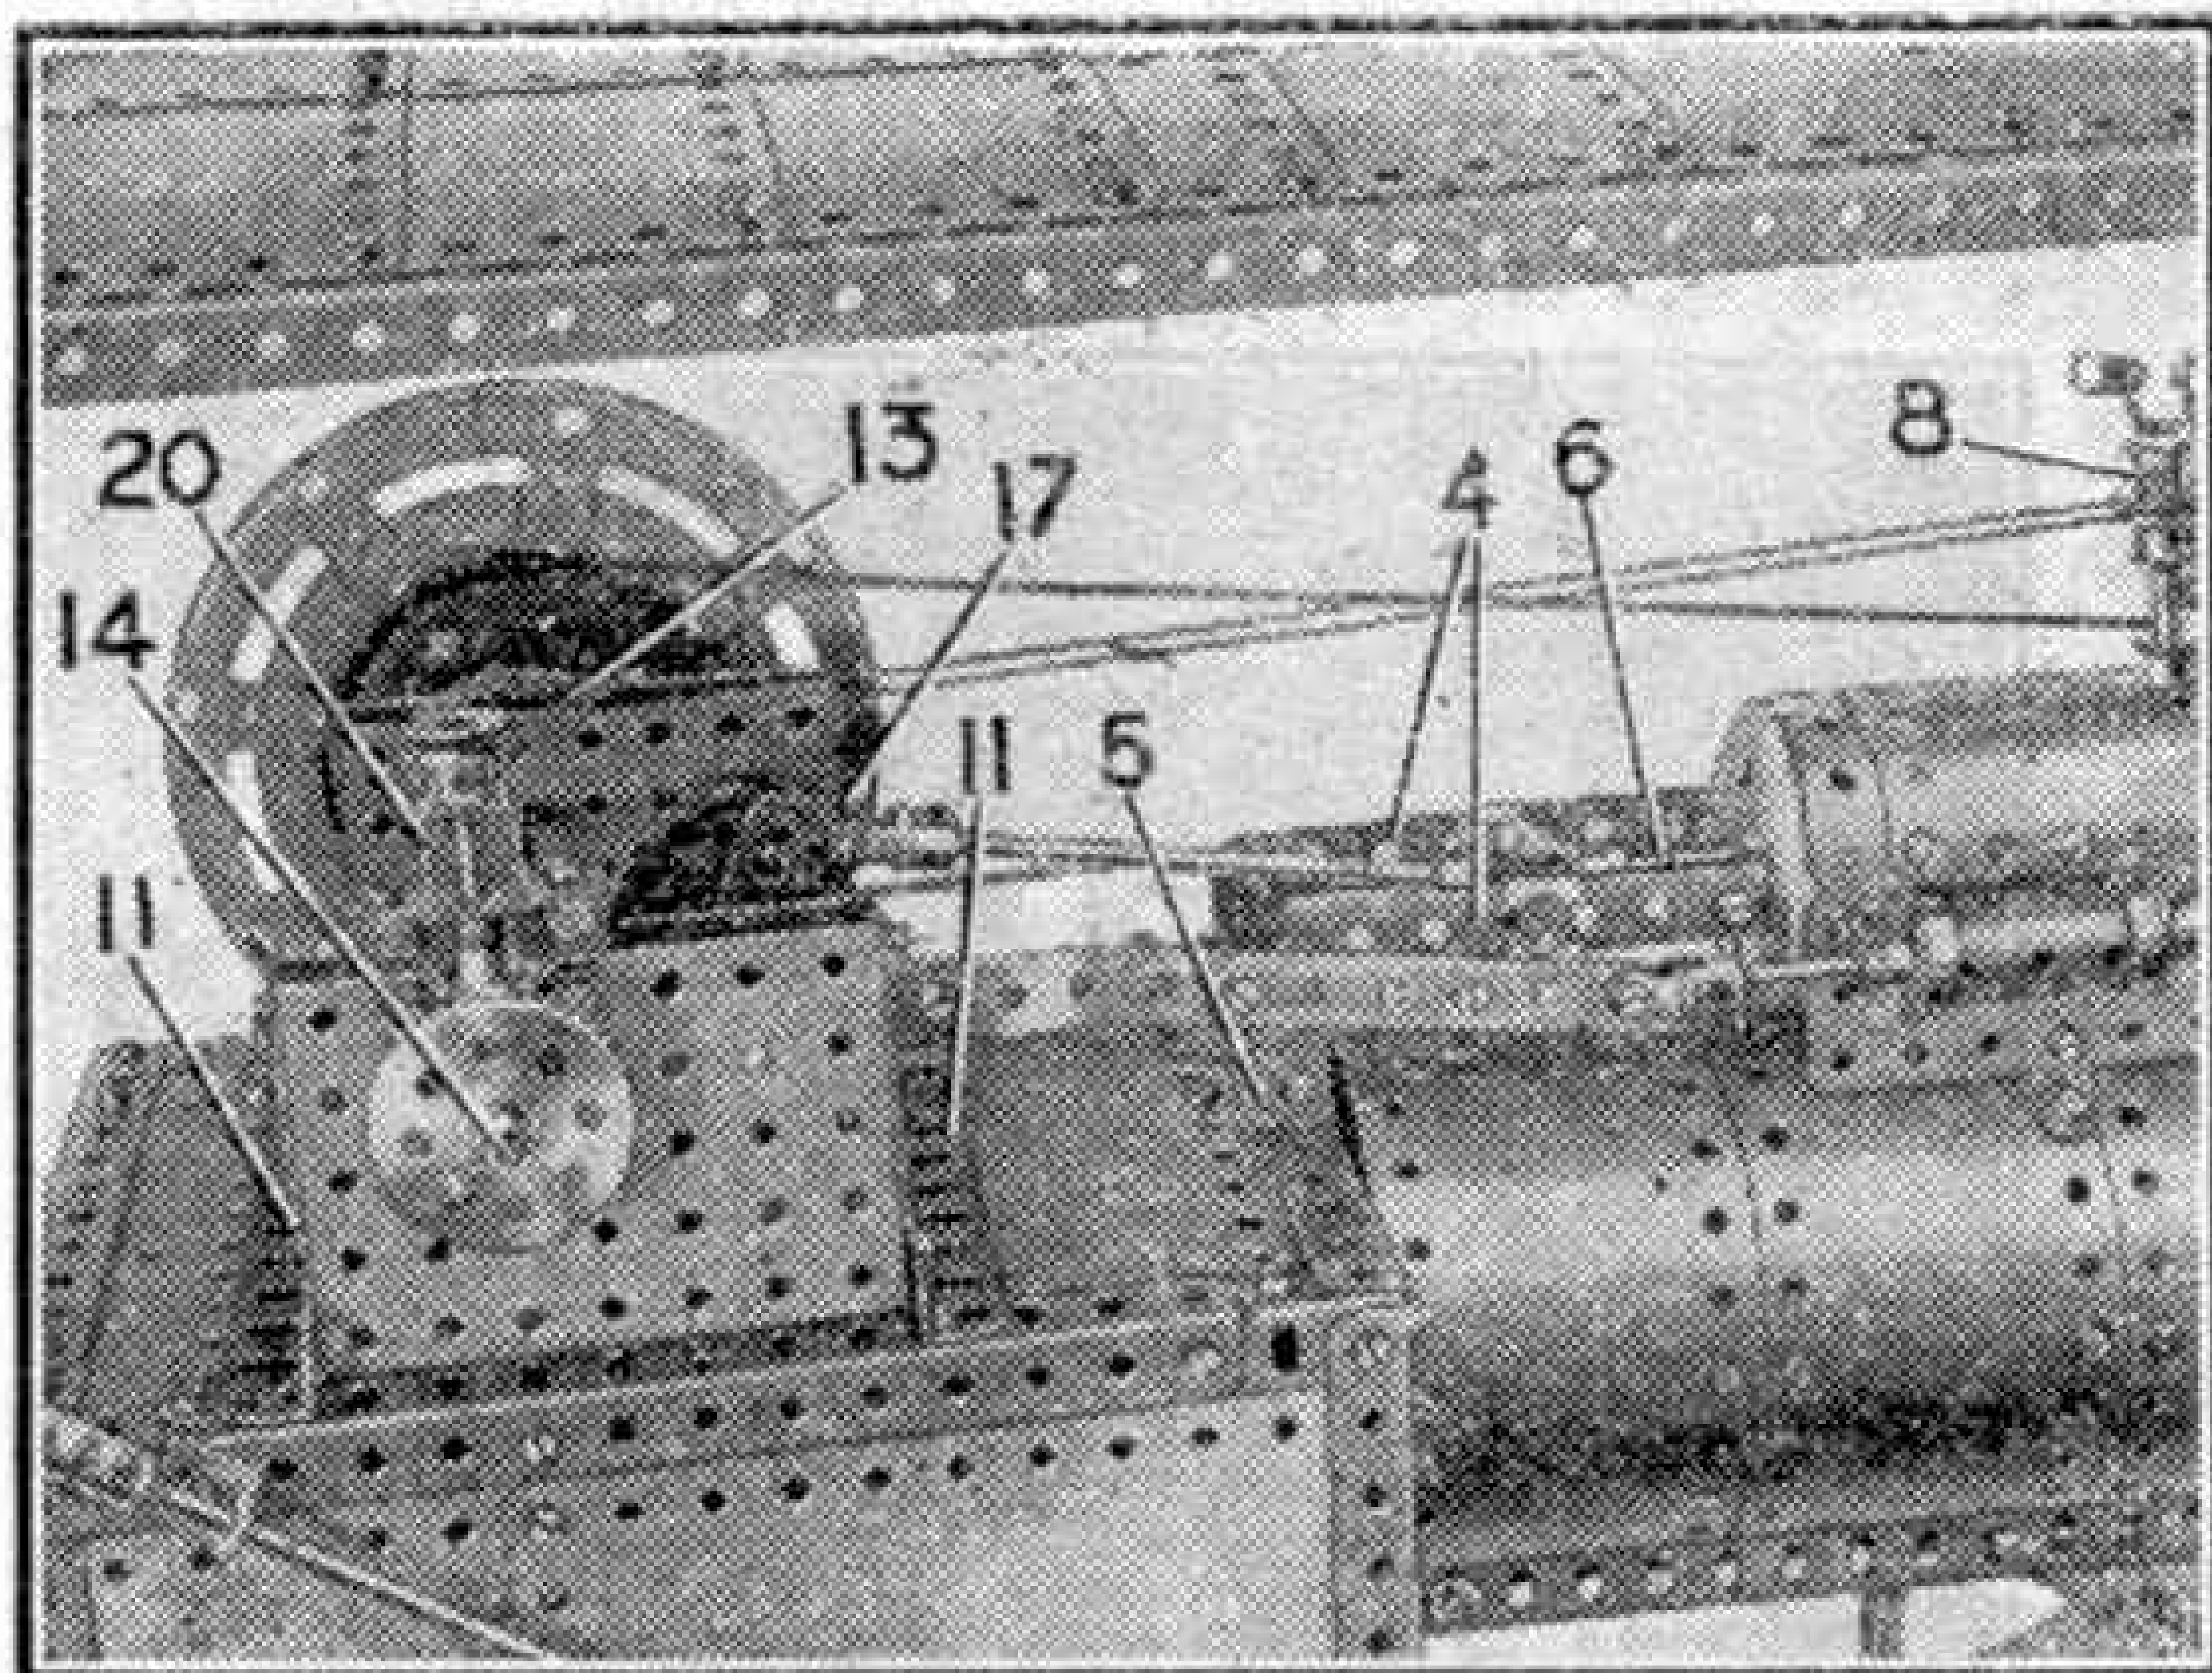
The engine, showing details of the crankshaft, slide bars, crosshead and the governor drive.
